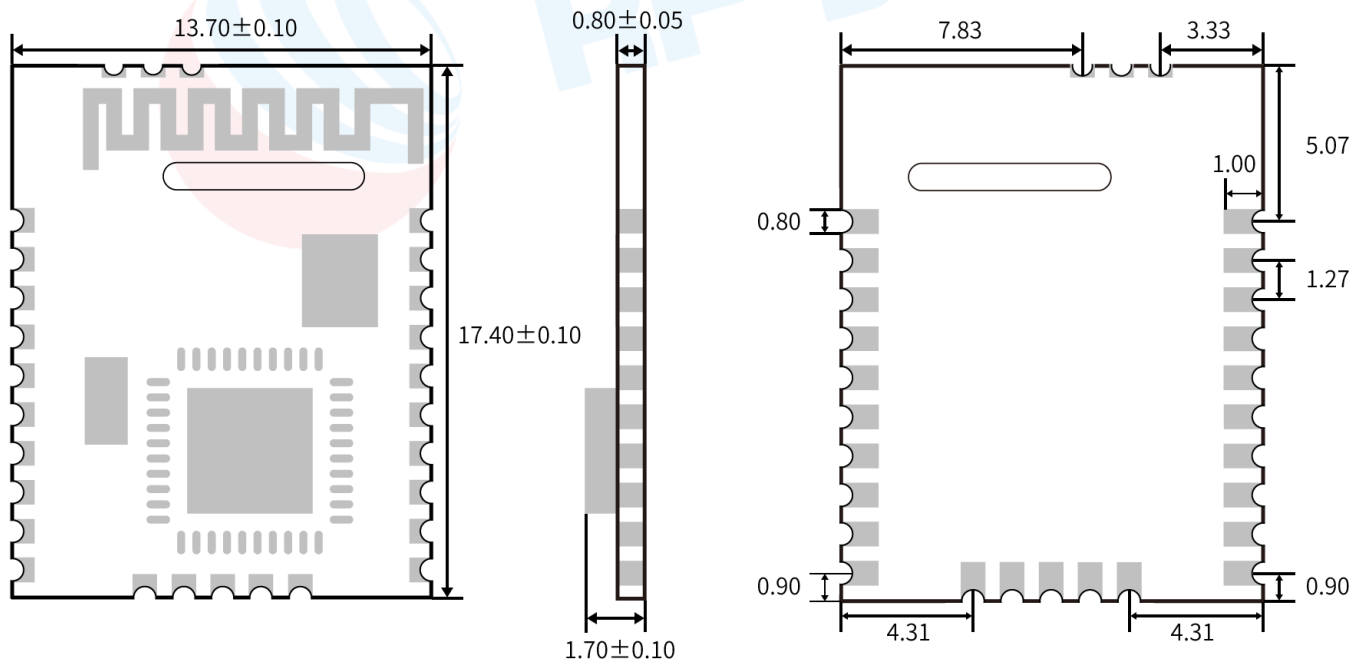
Recommended PCB Footprint of RF-BM-S01(A) (mm)
